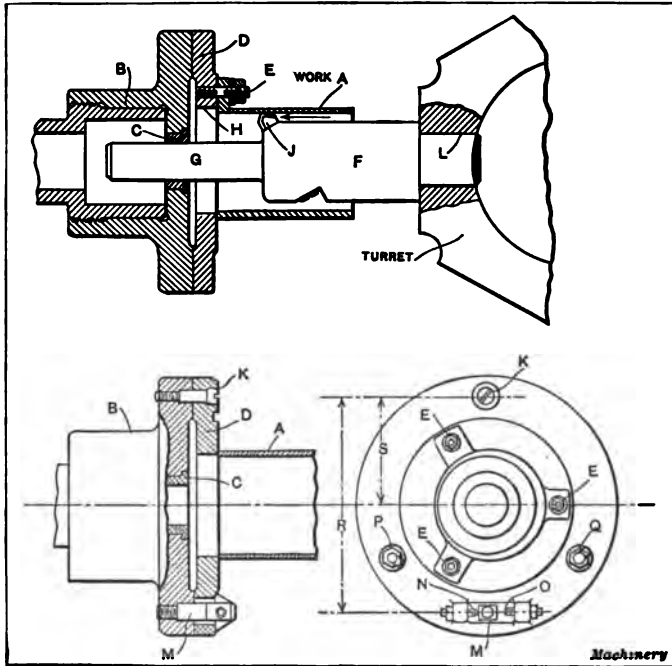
Swinging Fixture for Eccentric Piston Ring
